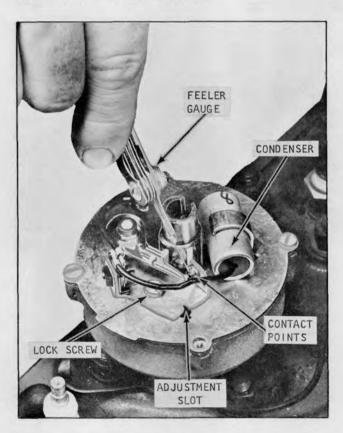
Contact Point Adjustment To check point opening with a feeler gauge, insert a wire feeler gauge of proper size between the contact points. MAKE CERTAIN THAT THE BUMPER BLOCK ON THE MOV-ABLE CONTACT IS AT THE HIGH POINT ON THE CAM. If adjustment is necessary, loosen the lock screw, and insert a screw driver of
